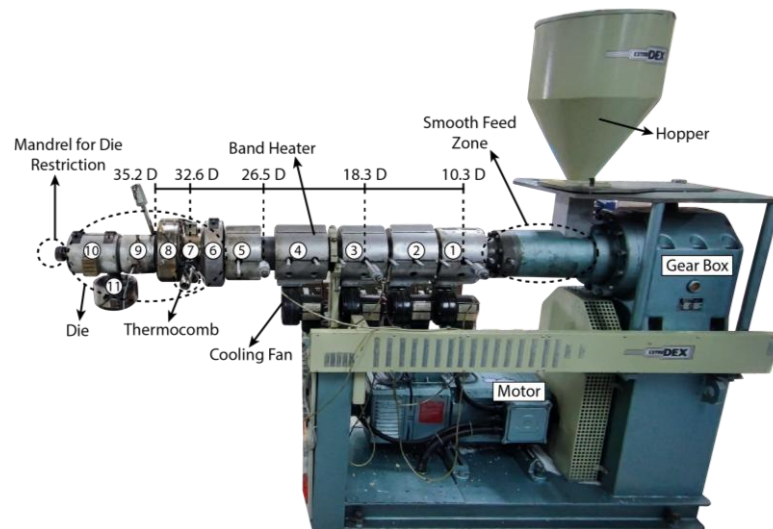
Single-screw extruder EN045-30, Extrudex Kunststoffmaschinen GmbH (Mühlacker, Germany) with a conventional screw and a smooth feed zone.
